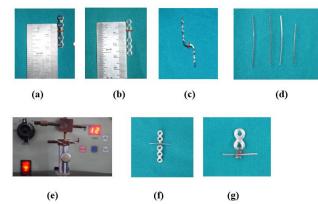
Design and Steps in Fabrication of Implant Guiding Jig The new implant guiding jig is fabricated using the mini plates with holes of 2mm diameter to which 0.017" X 0.025" SS
